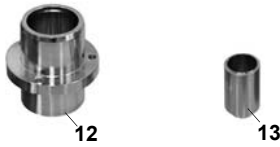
KL-0039-7501 Sleeve Set, Mercedes Sprinter (W904)
